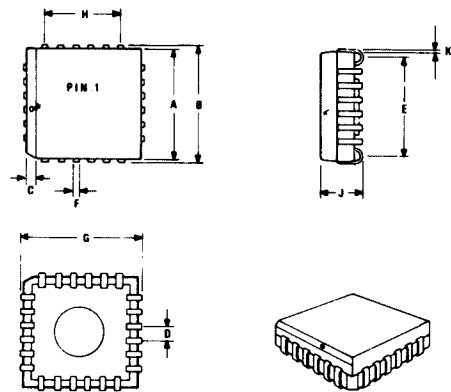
FX009LG PACKAGE DIMENSIONS
